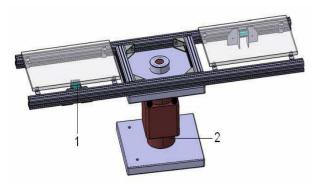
Feeding device designed by CATIA V5R16: 1 – mechanic switch, 2 – rotary motor [6].
